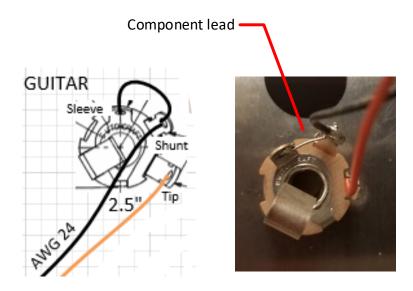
Solder the component lead between the shunt and sleeve connections of the Guitar Jack and then solder the orange and black wires
